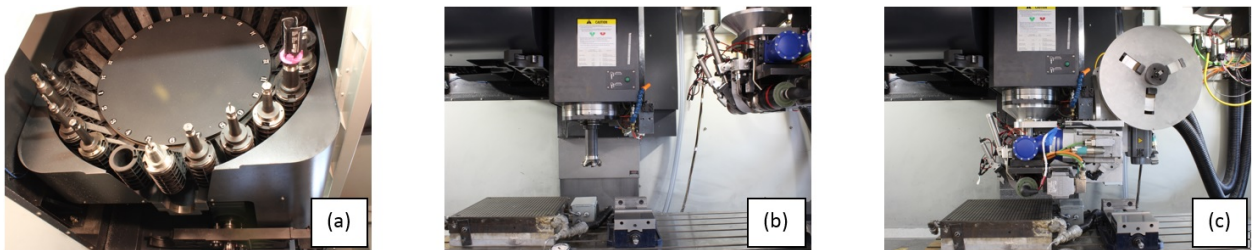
Welder treated as a tool within the CNC framework. (a) Tool magazine, which holds up to 25 different tools. (b) Clamshell cutter loaded in spindle and welder in storage position. (c) Welder loaded in spindle.
